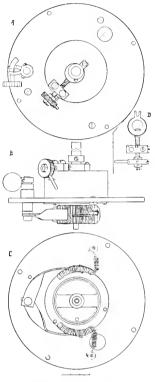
Top, side and bottom view of spindle, viscosity chamber cap, and brake. To the right is a top view of the clamp for stopping the drum.
